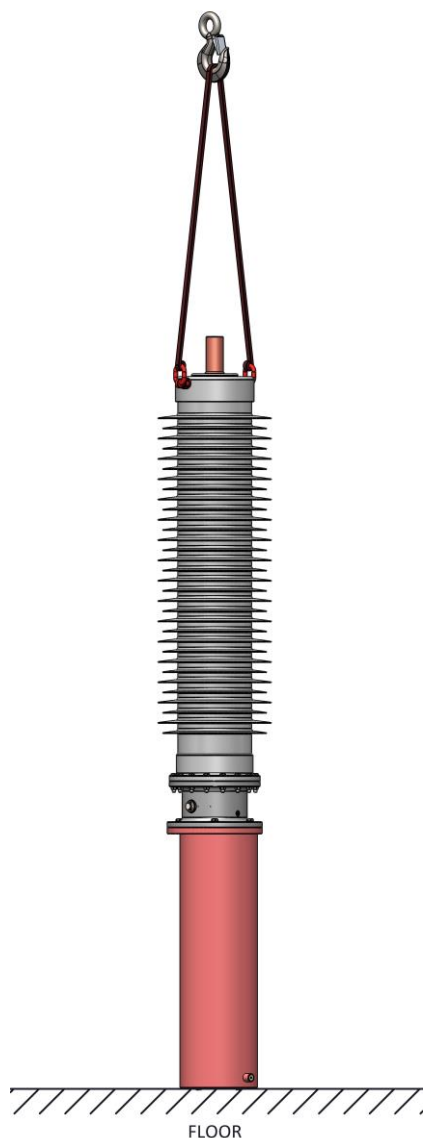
Rest bushing vertically on hard floor to remove protection tank, while ensuring bushing is engaged in crane Hook.
